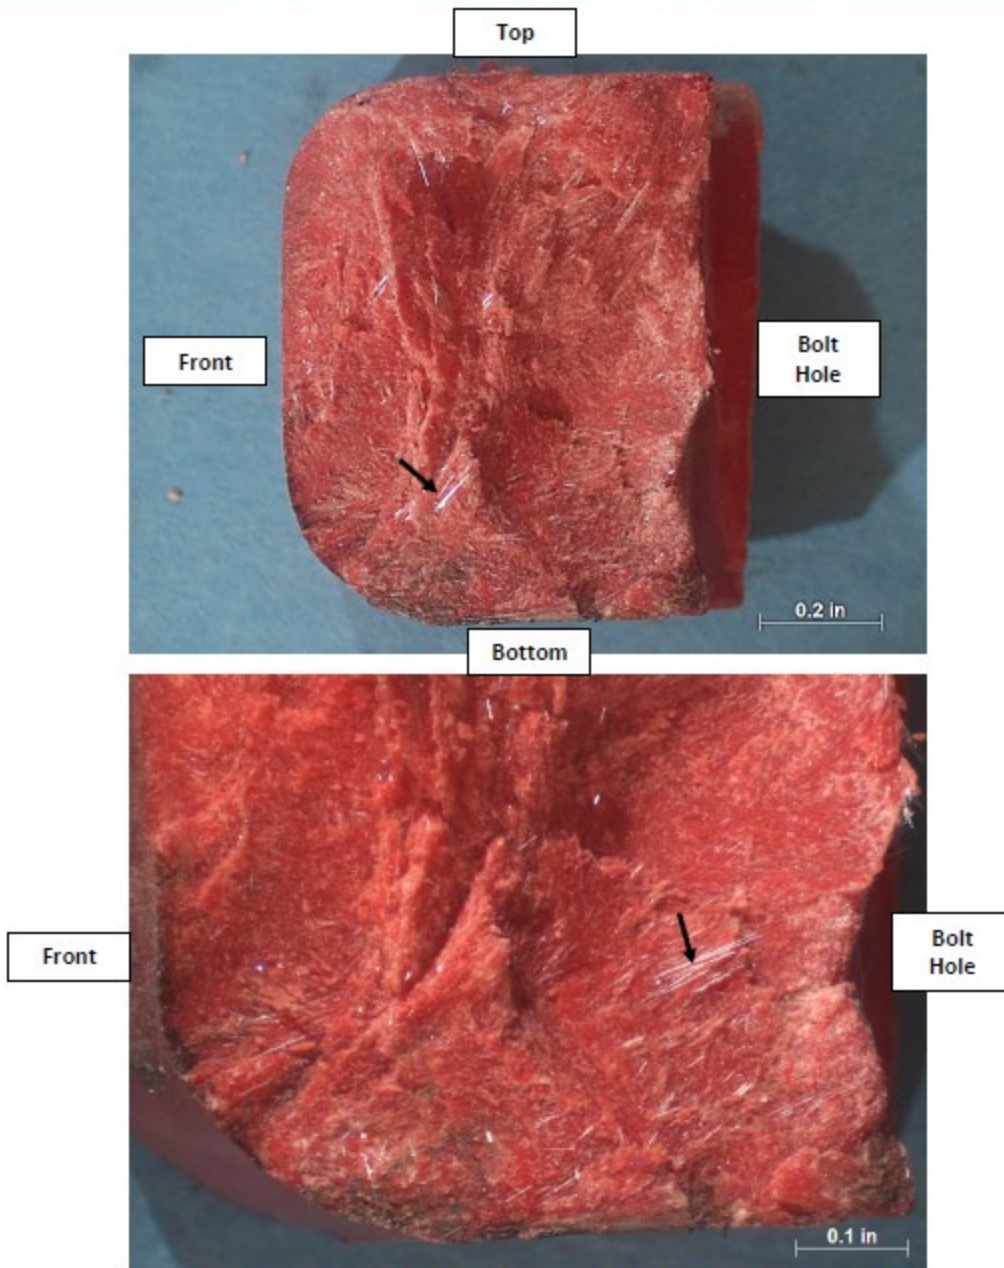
Macrographs of the opened fracture surface from Sample 2-2 showing a smooth and relatively flat fracture surface with areas of exposed fibers (black arrows).
